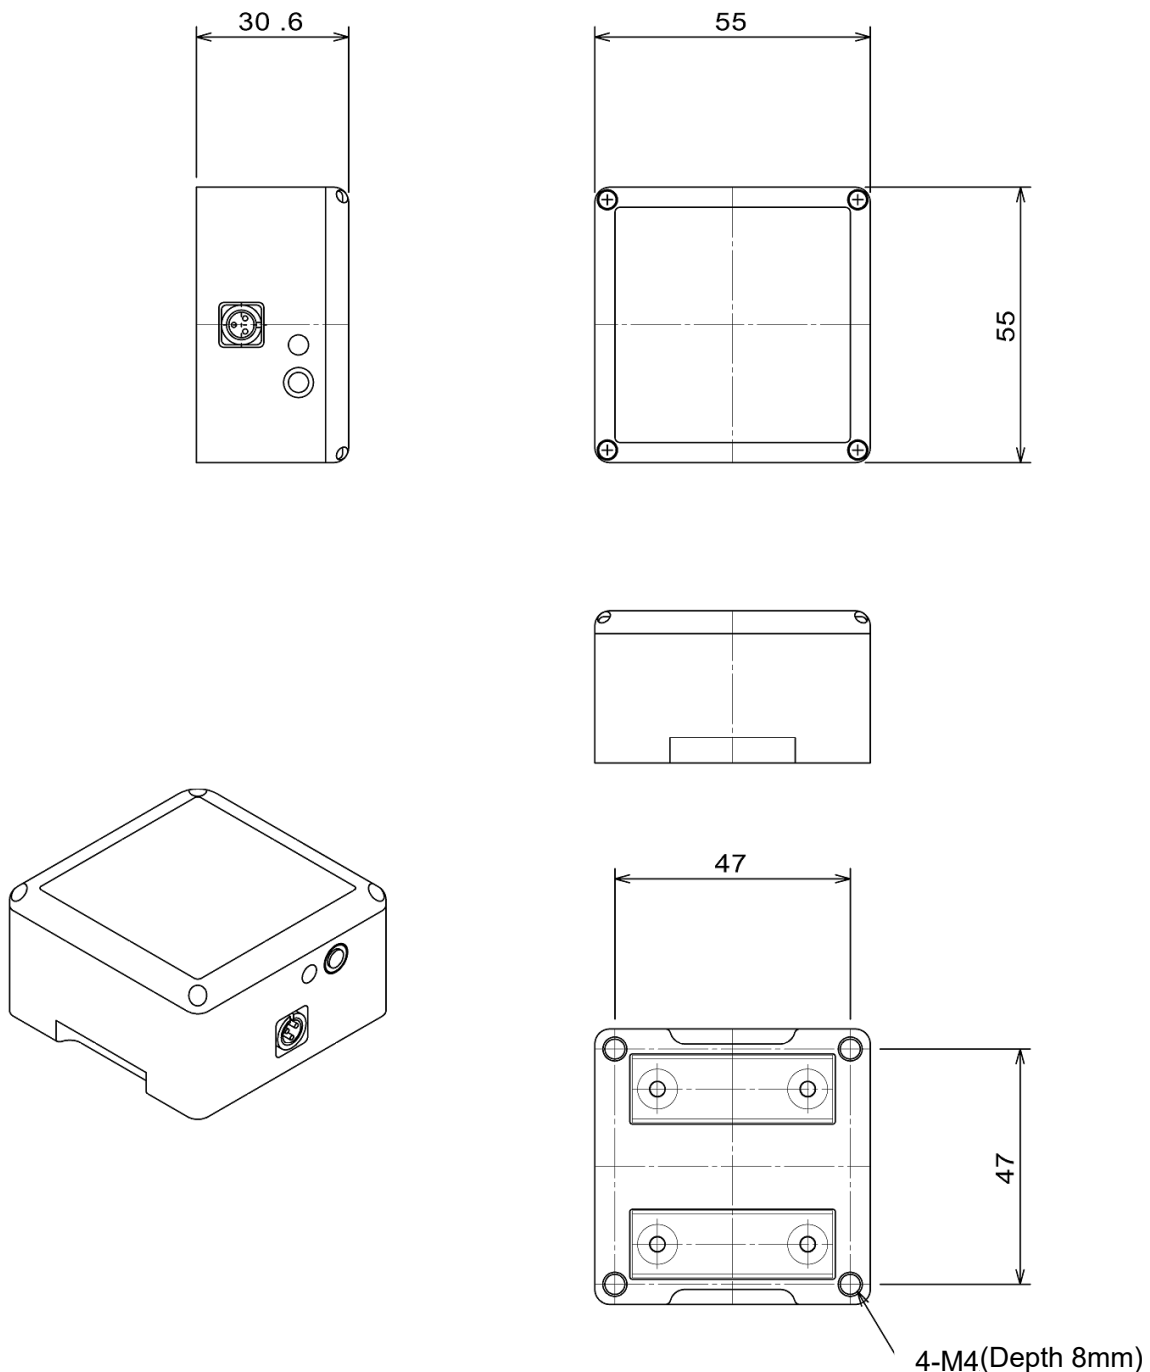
(a) Dimensions of the wireless accelerometer
